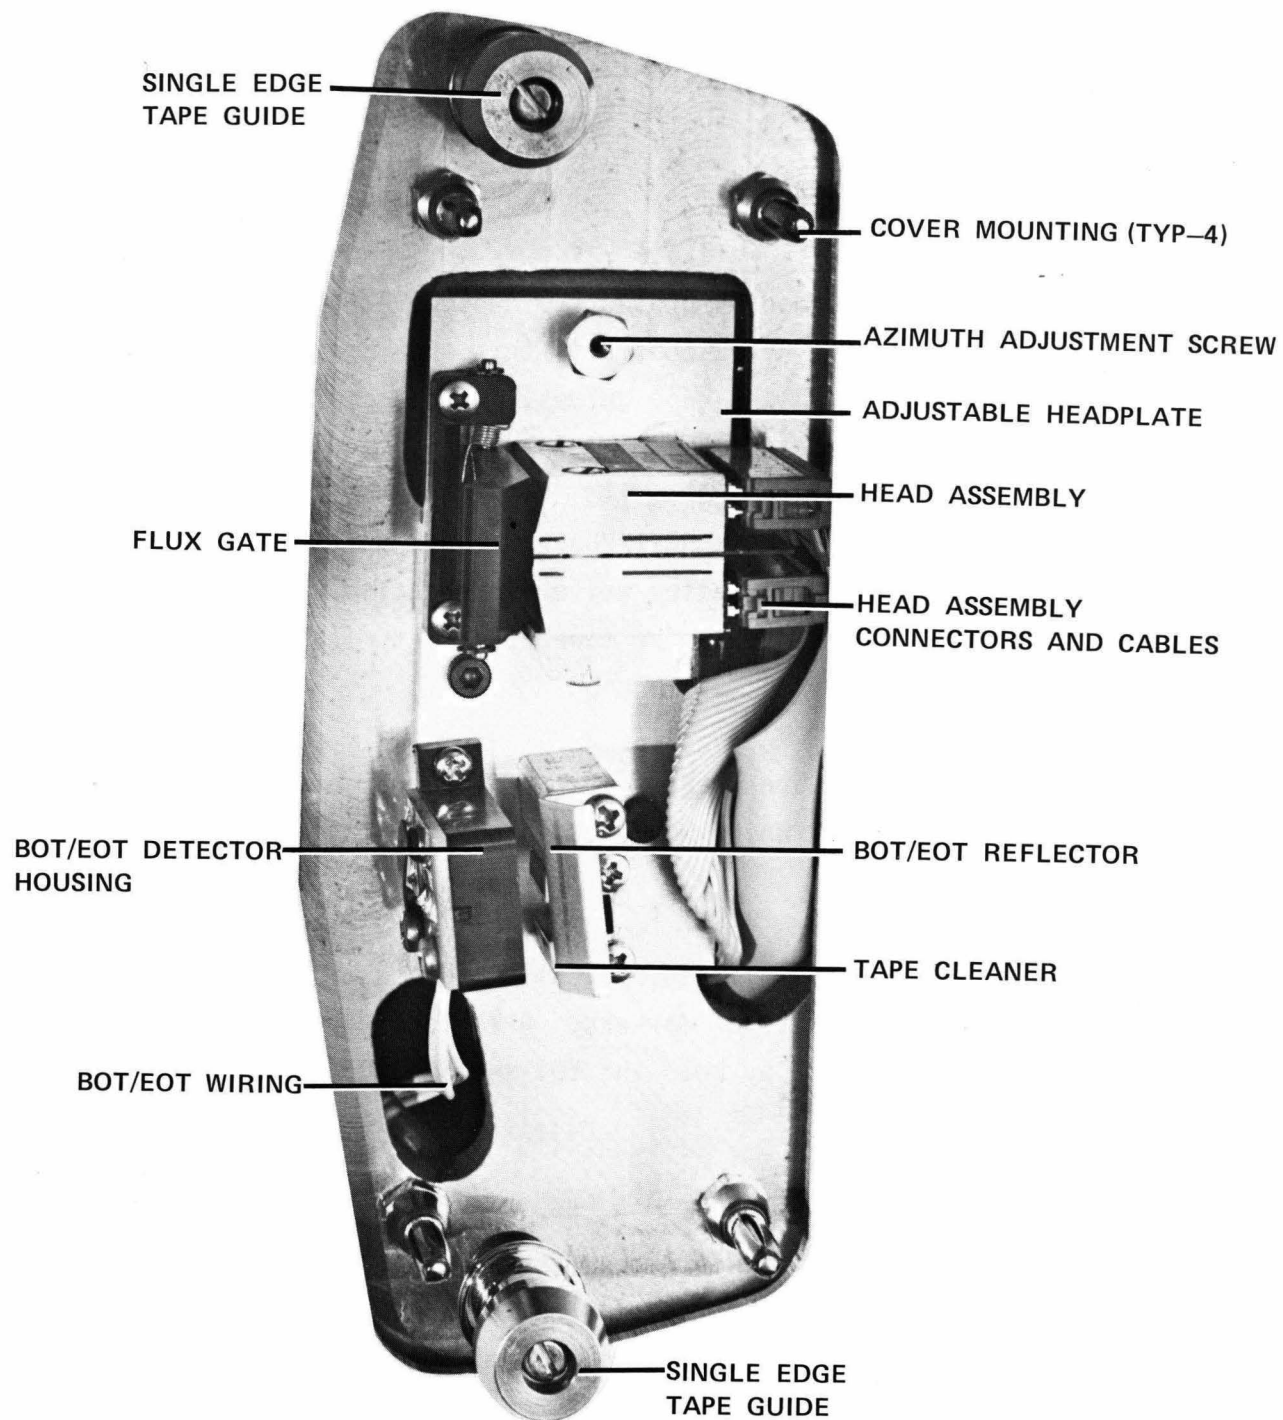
HEADPLATE ASSEMBLY DETAILS
